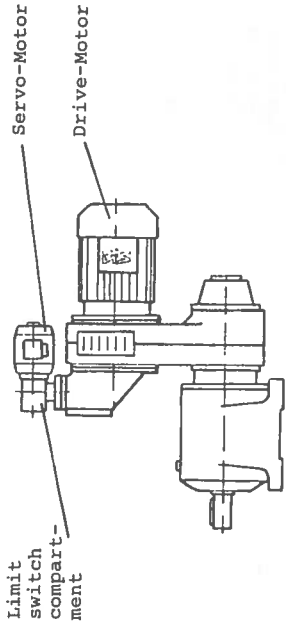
Beltdrive "Varigear" with Servo-Motor
